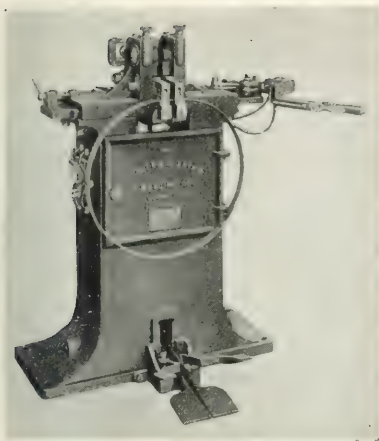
ELECTRIC WELDER FOR CARRIAGE
